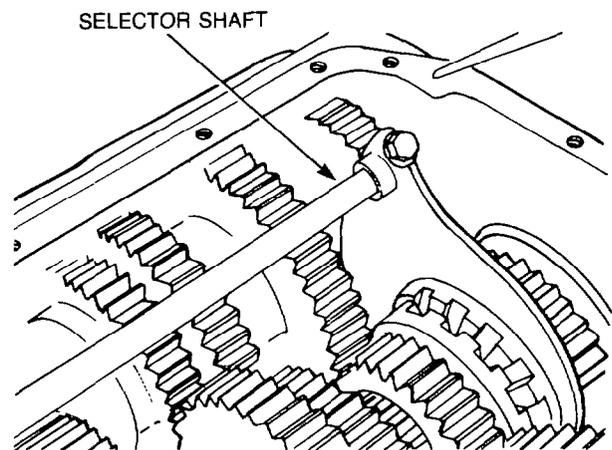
Installing Selector Shaft, Fork and Stop Pin
